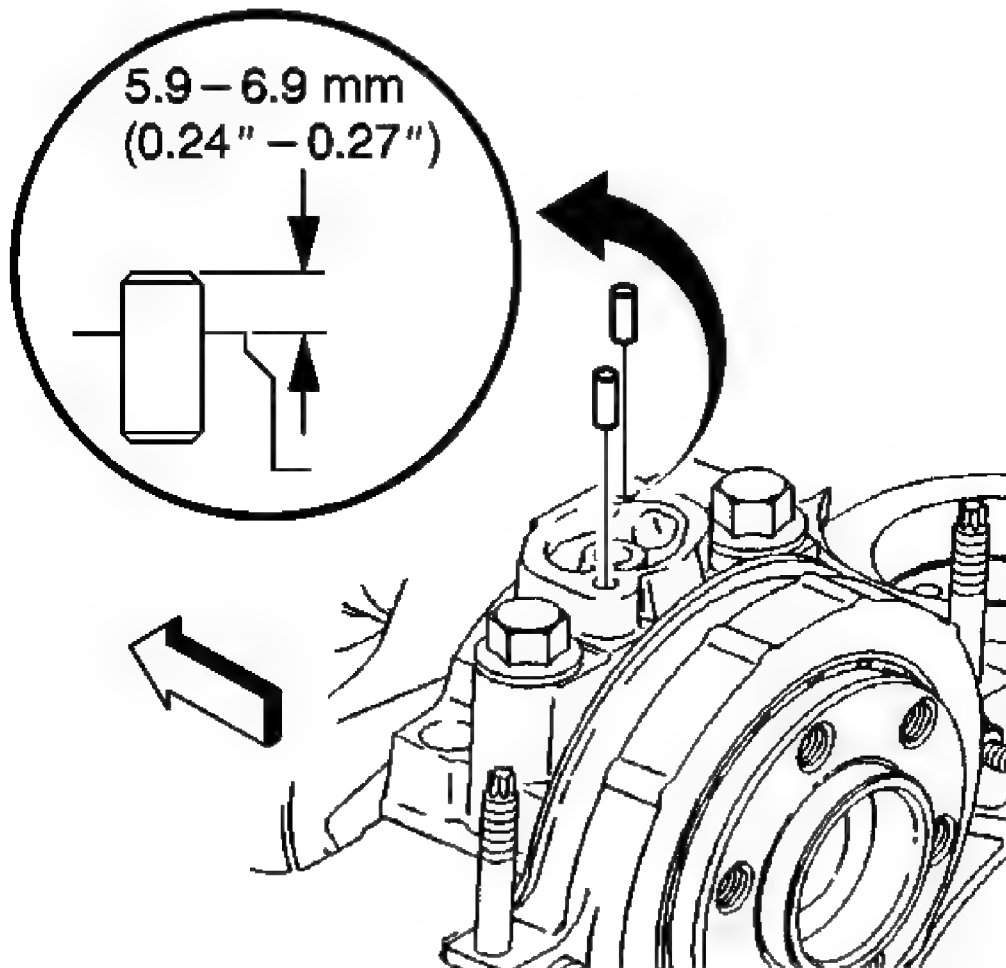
Oil Pump Locator Pins Proper Installation Position
